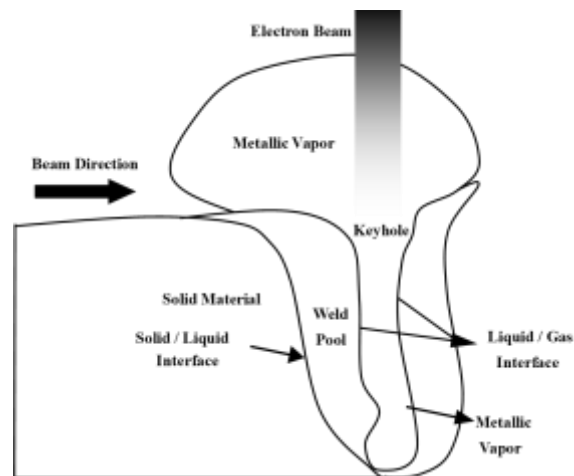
The schematic of vacuum electron beam welding process.
